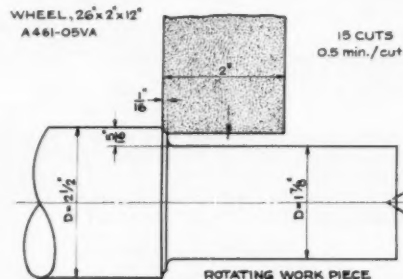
SKETCH OF ARRANGEMENT IN FIG. 1 (Wheel is shown early in cut which is made to a depth of $\frac{1}{8}$ in. on diameter of work, and which takes $\frac{1}{2}$ min.)
